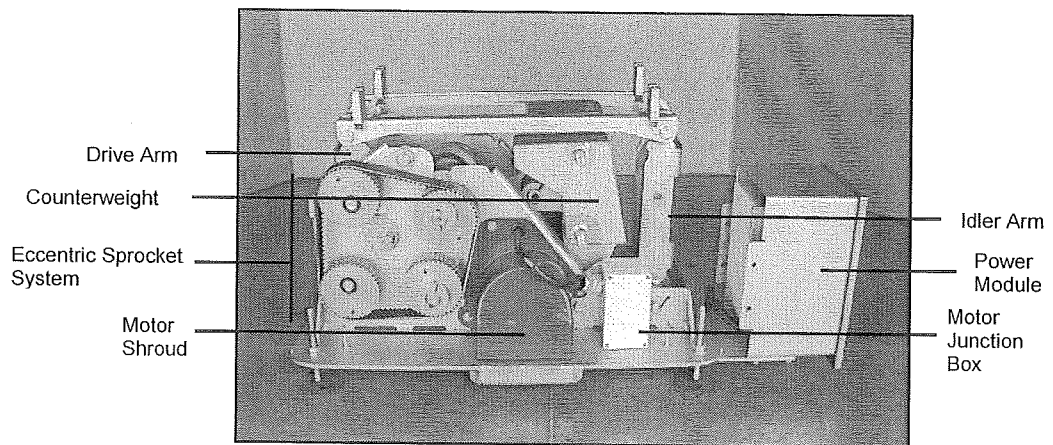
Eccentric Sprocket Side View of Drive Assembly
